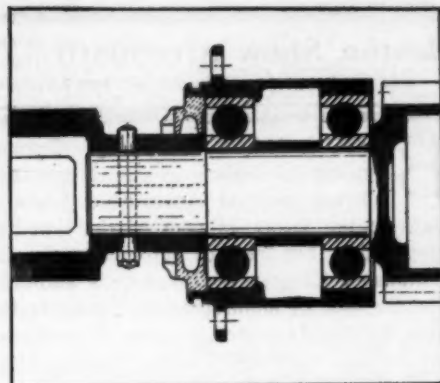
Cross section through the stub shaft for the transmission gear and one member of the universal joint, showing a parallel fit and a pin in addition to a key at the joint end
